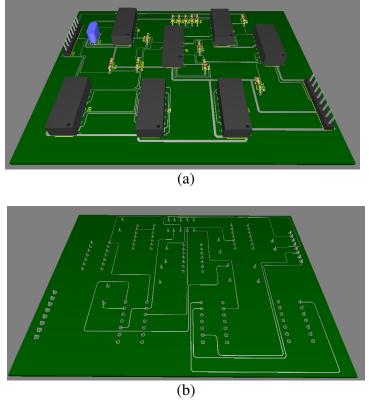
(a) Top Layer View of a Student PCB Design. (b) Bottom Layer View of the PCB Design
